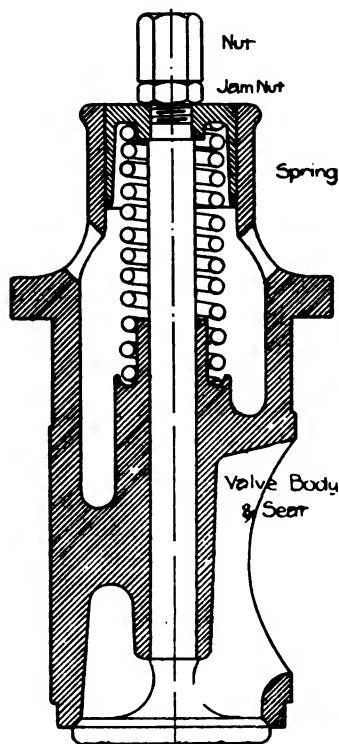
Section through Inlet valve, showing details of valve, spring and cage
